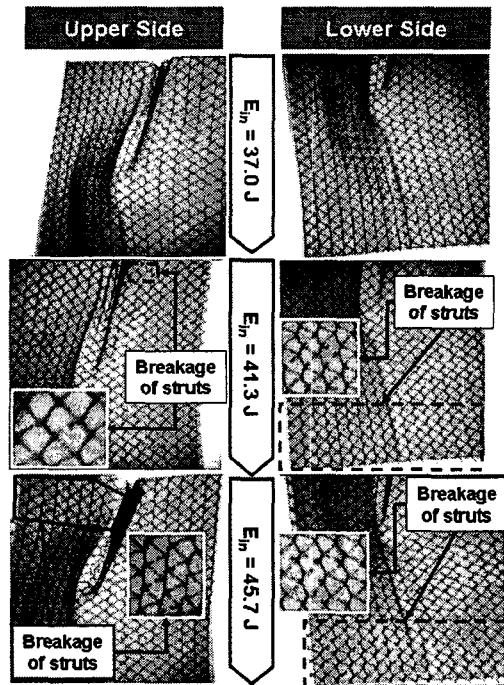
Deformed shapes and failures of inner structures for welding specimens
